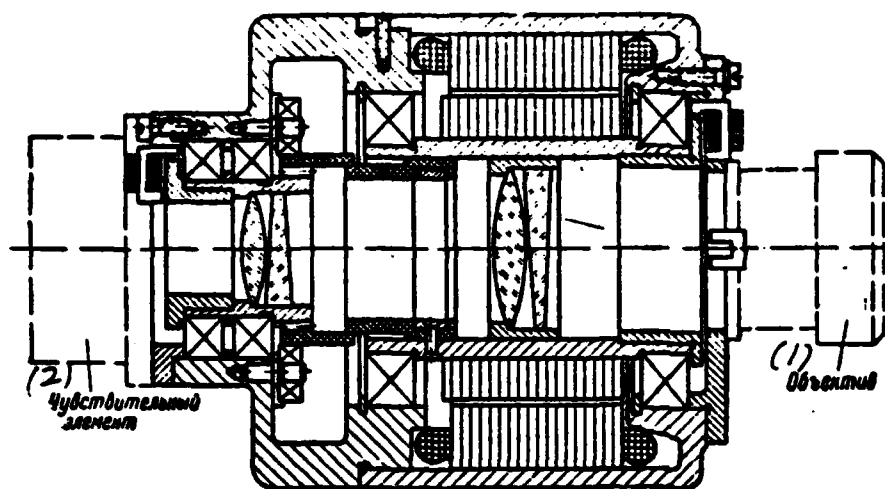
Optical-mechanical scanning device/equipment with the flexible drive and two optical wedges.
